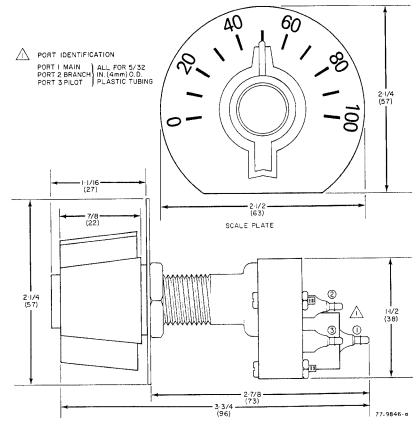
APPROXIMATE DIMENSIONS OF RP975A WITH SCALE PLATE AND KNOB IN INCHES (MILLIMETERS)
